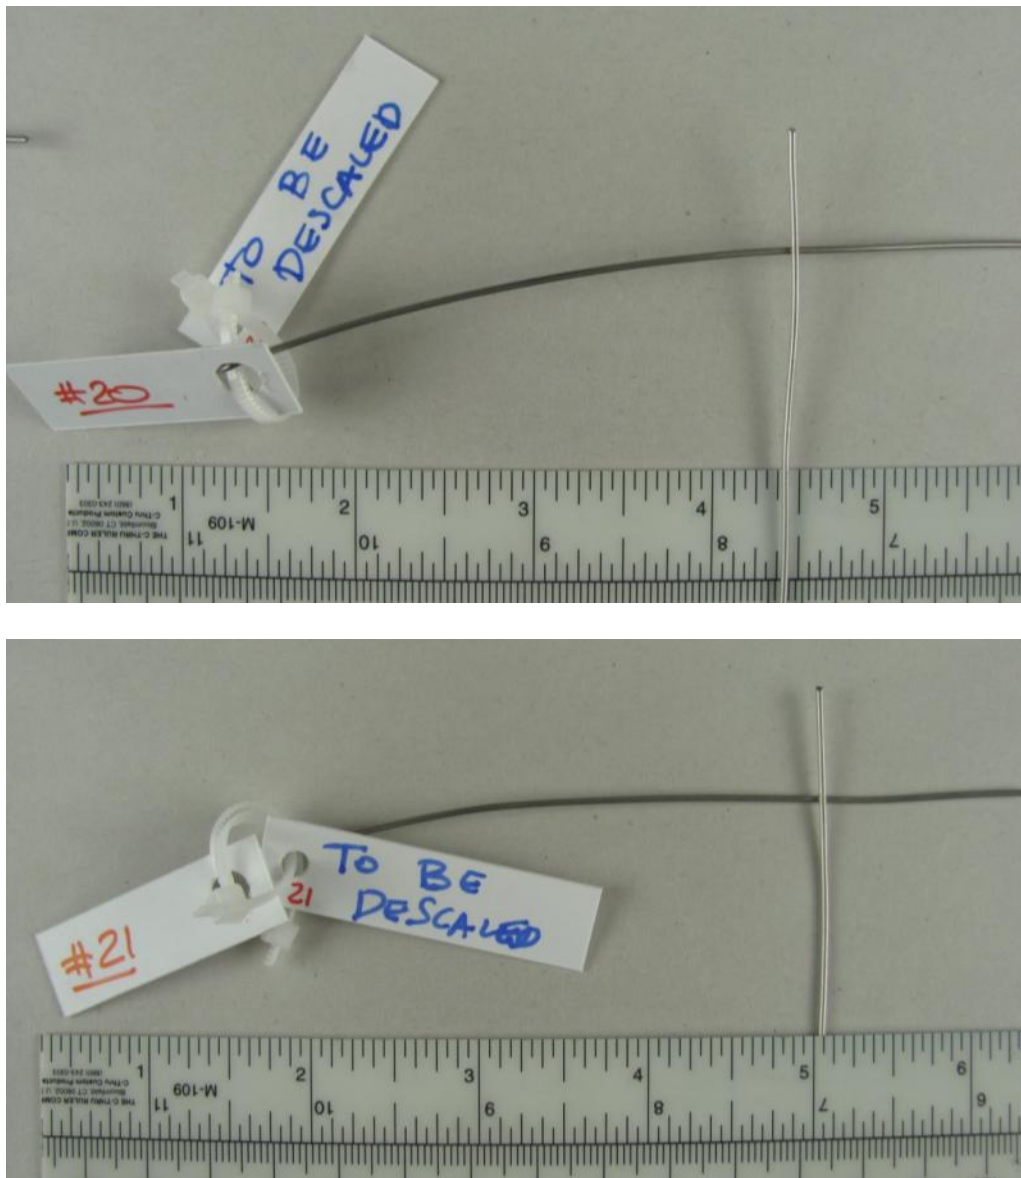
Macro photographs showing the as-received appearance of the Type 321 solid wire weld samples prior to descale / passivation and salt spray testing. Sample #20 and Sample #21 are shown.
